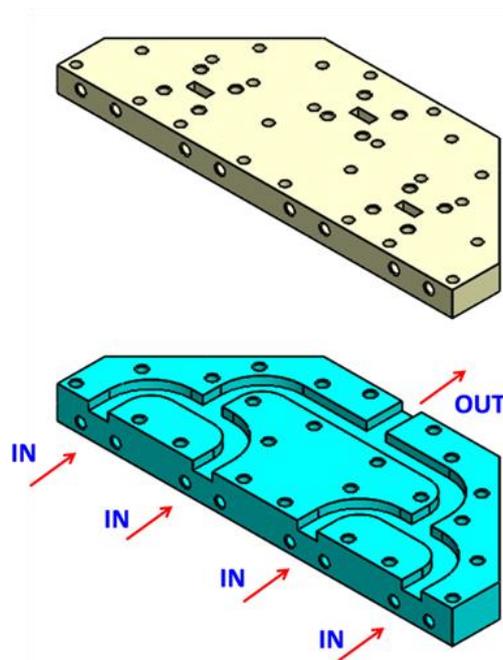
Exploded view of the 4-way power combiner bottom and top plate
